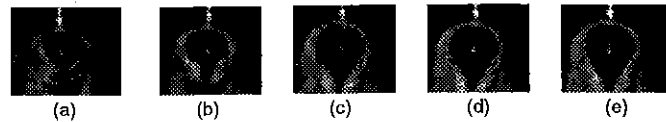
Weld pools generated using different welding currents. Arc length=3mm, torch speed=1.9 mm/s, GTA welded, SS 304. (a). 90A, $w_b=1.8$ mm. (b). 95A, $w_b=3.0$ mm. (c). 105A, $w_b=4.0$ mm. (d). 110A, $w_b=4.5$ mm. (e). 115A, $w_b=5.0$ mm.
